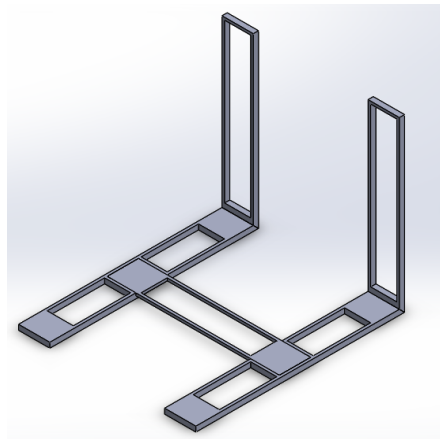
The fully-assembled Shigley Hauler (before testing)
